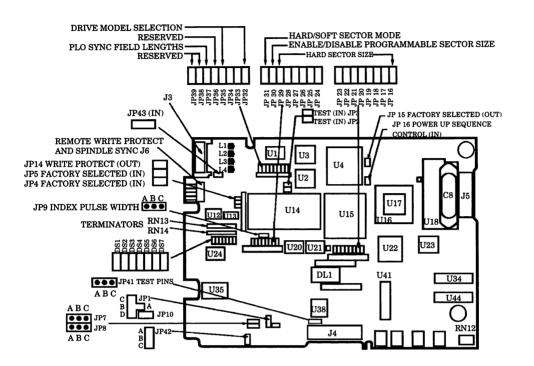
Drive Jumper Options (PCB P/N 1015468)
